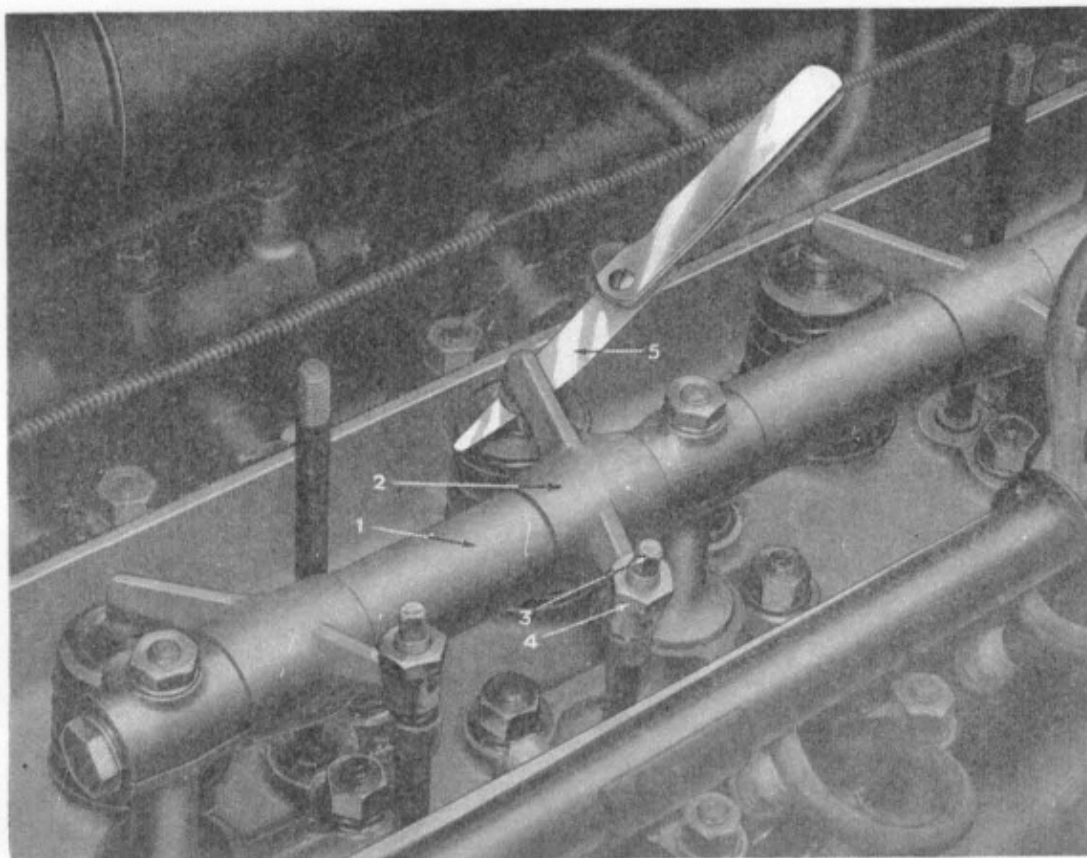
ADJUSTING THE INLET VALVE ROCKER CLEARANCES.
